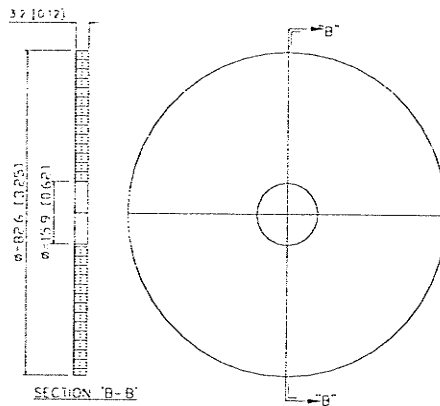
Schematic drawing of gasket used with 24.5mm (1in.) flange assemblies.
